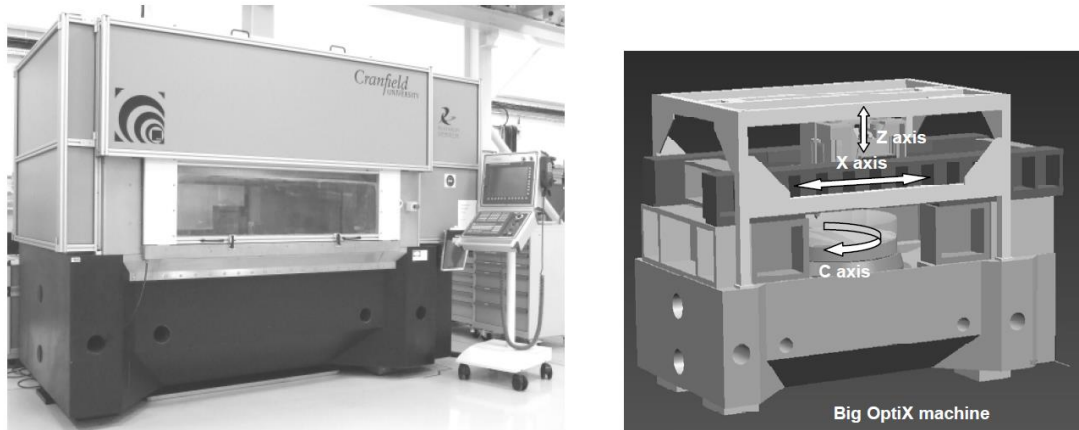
Cranfield University BoX grinding machine.^[33]
